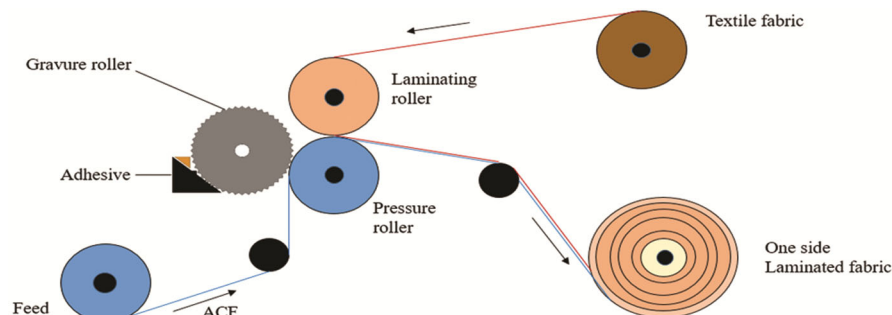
Schematic of a laminating machine used for fabric lamination
